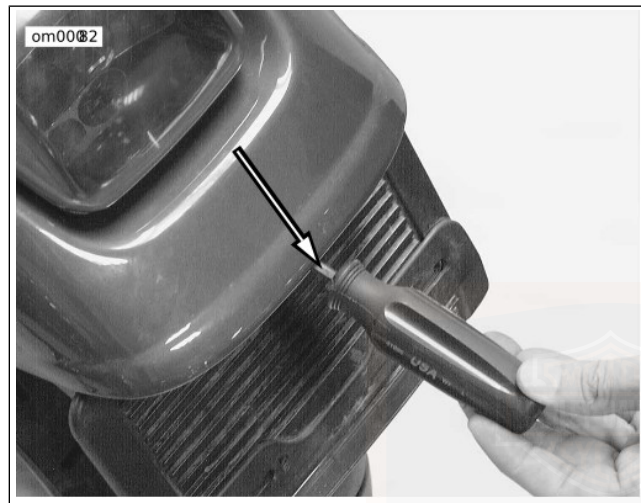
Tail Lamp Removal Access Hole: FXSTD Models
